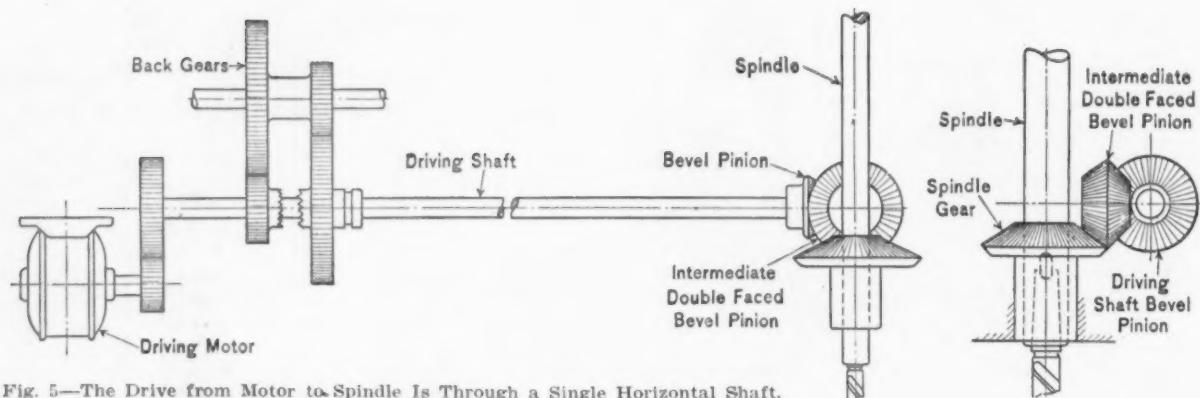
The Drive from Motor to Spindle Is Through a Single Horizontal Shaft, Four Gears and One Double-Faced Pinion
